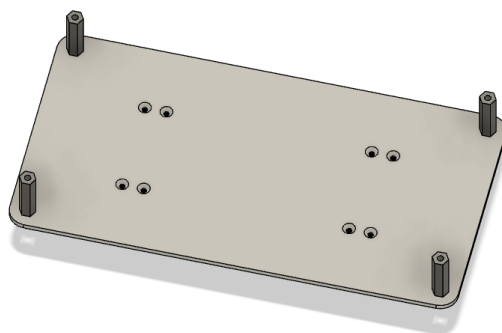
Bottom plate of the robot chassis with spacer pillars and electronic component mounts
